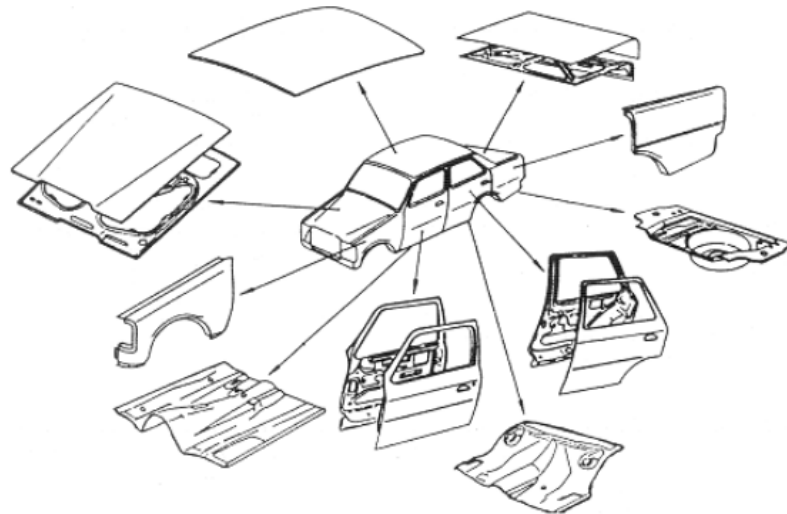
Metal sheet parts in major panels of car body [1]
